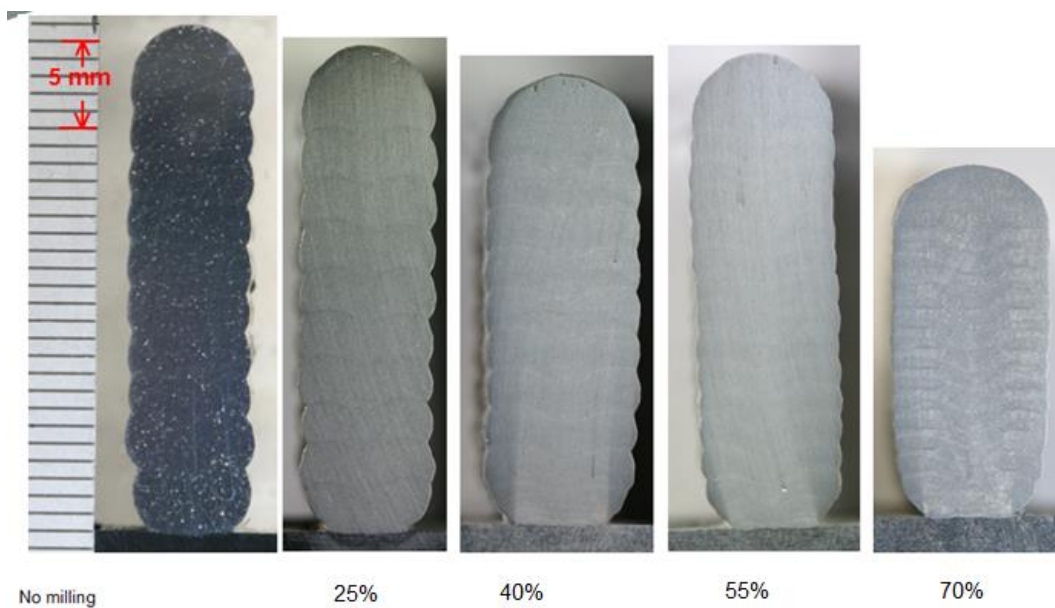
Cross-sectional macrographs of deposition welds with different milling amount
